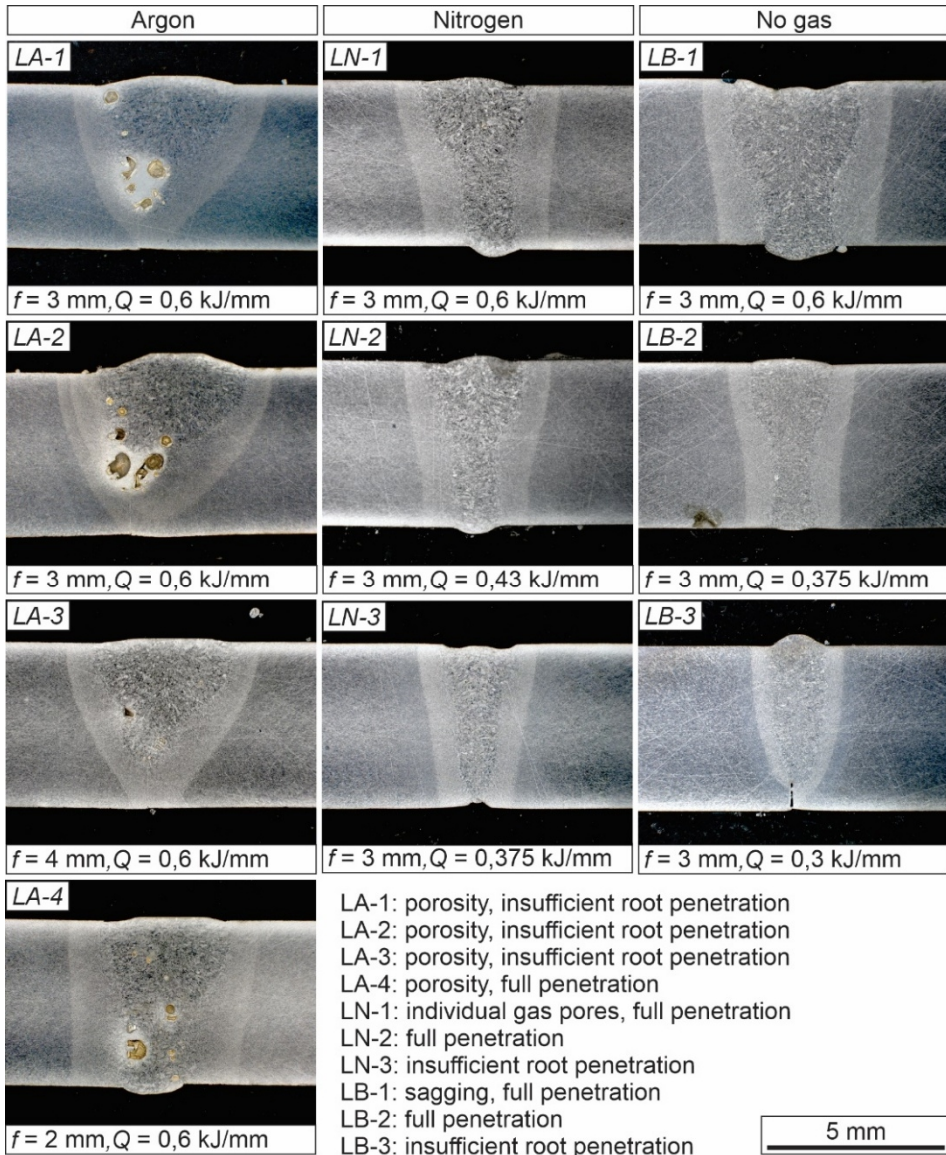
Macro-scale examination of laser-welded joints with different welding parameters and various shielding atmospheres
